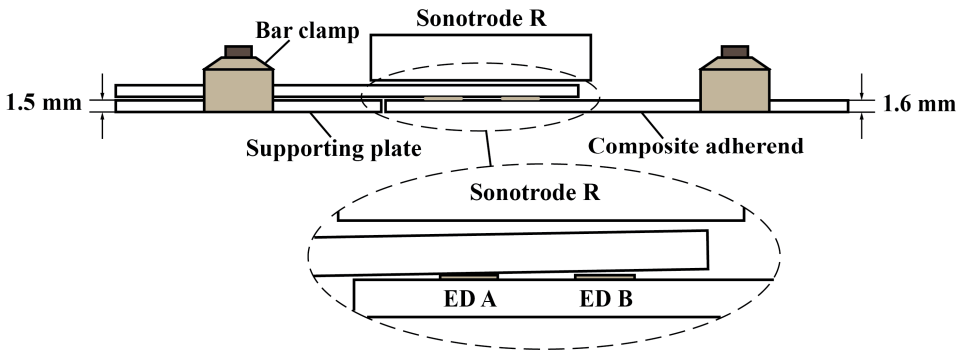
Schematic of the lack of parallelism between top and bottom adherends caused by the clamping situation during the simultaneous double-spot welding process. Dimensions are not to scale.
